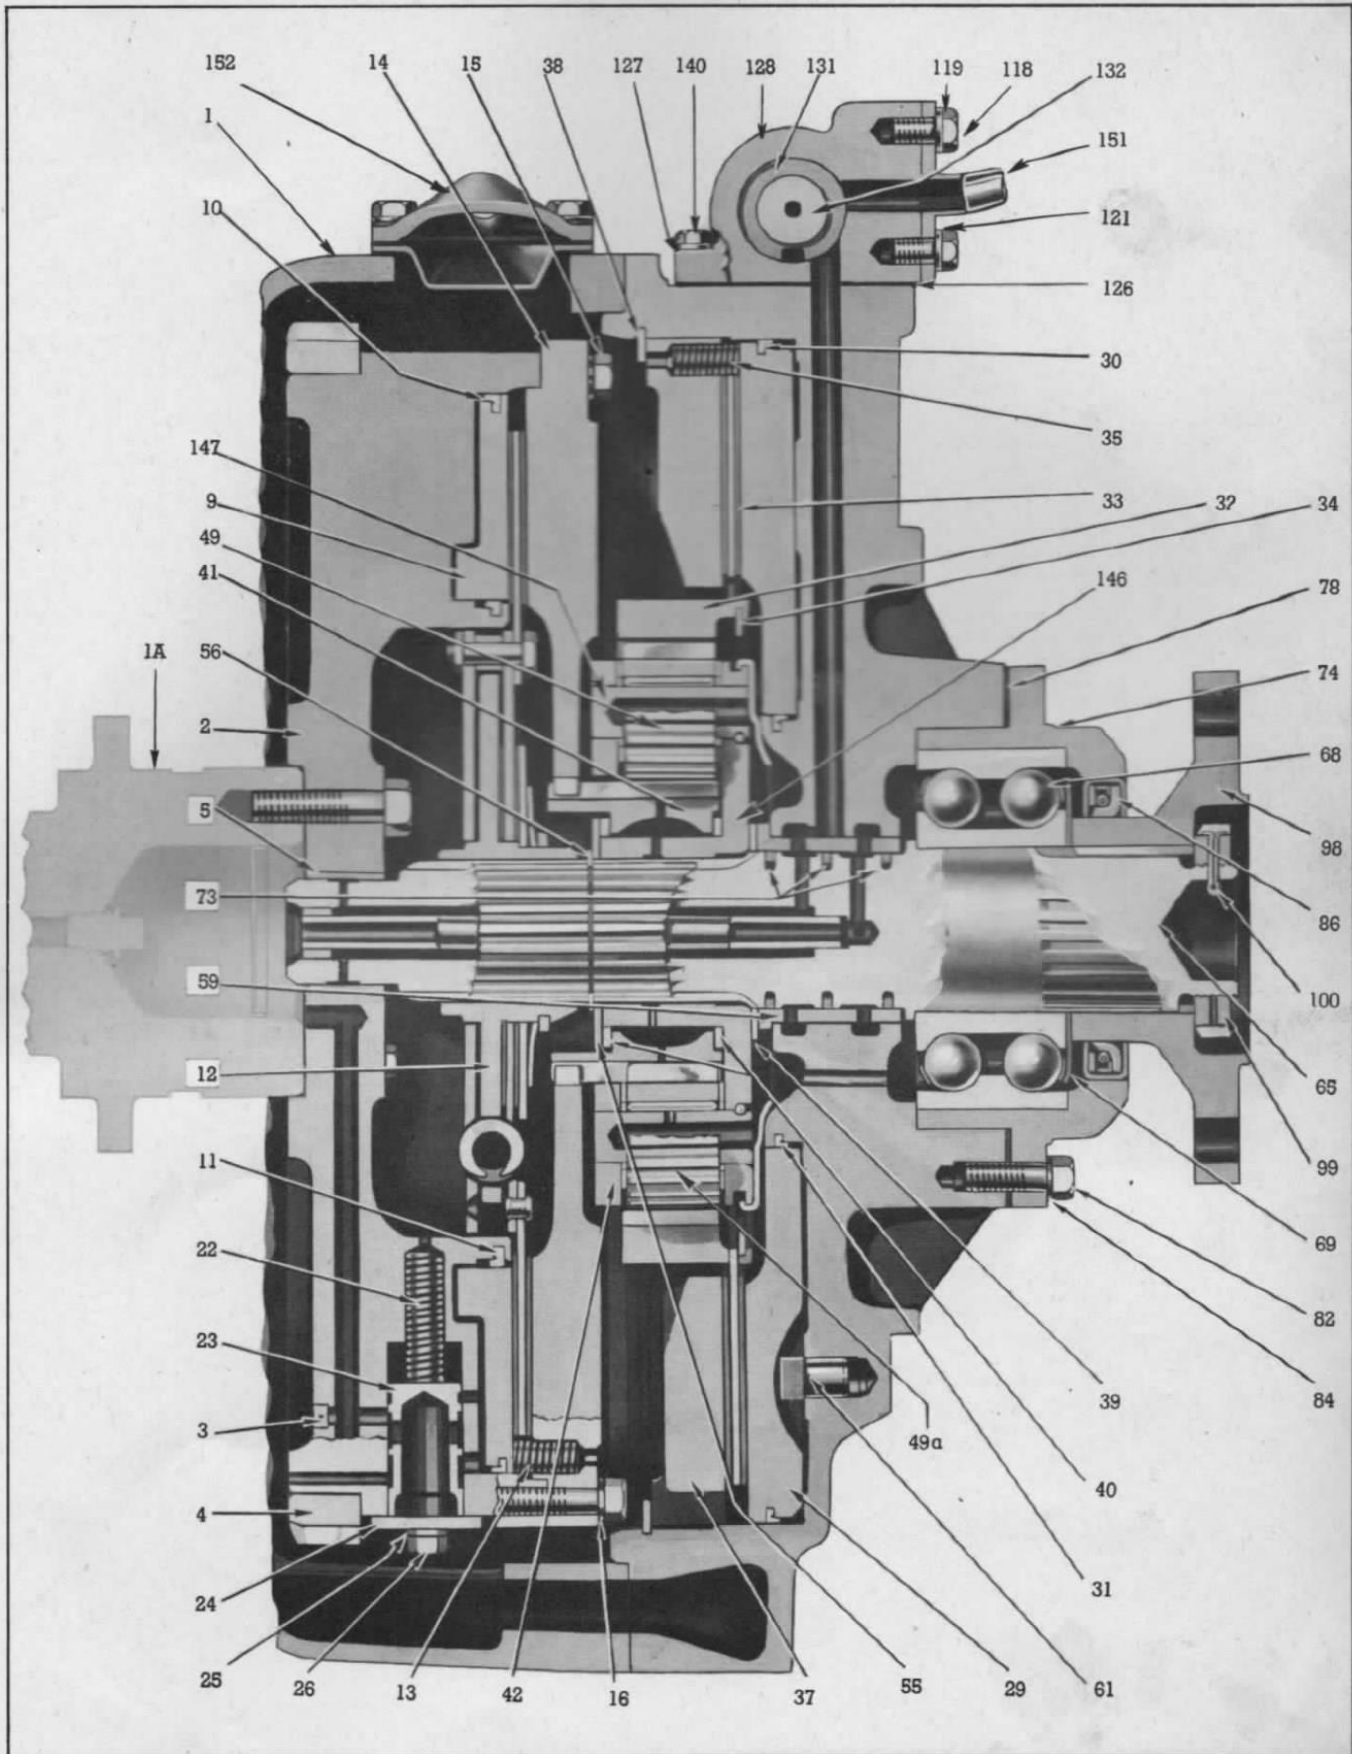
Side Cross Section of Hydraulic Marine Reverse Gear
